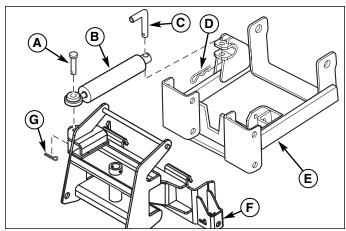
Cylinder Installation A. Clevis Pin E. Hitch B. Hydraulic Cylinder F. Frame Assembly
